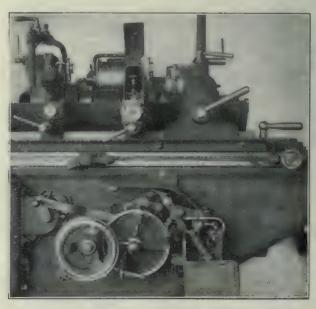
Automatic Feeding Mechanism, Cylindrical Grinder.
